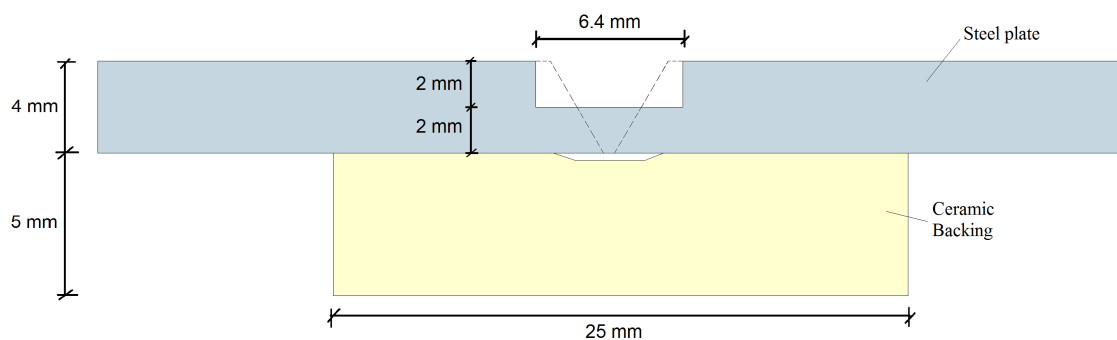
The geometry of the removed section. The location of the V-shape butt weld of the initial weld is shown for reference.
